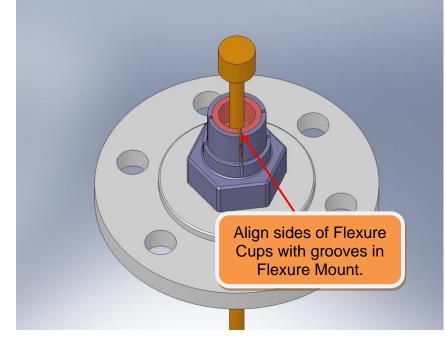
The Flexure Cups must sit flush inside the Flexure Mount. Next, we will seat the Flexure within the Flexure Cups. *These are the most critical joints in the entire assembly!
